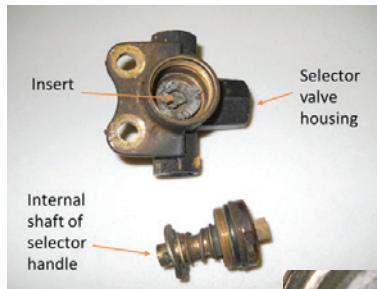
Fuel selector valve housing and section of selector handle (above) and fuel selector insert with fractured pieces (right).
